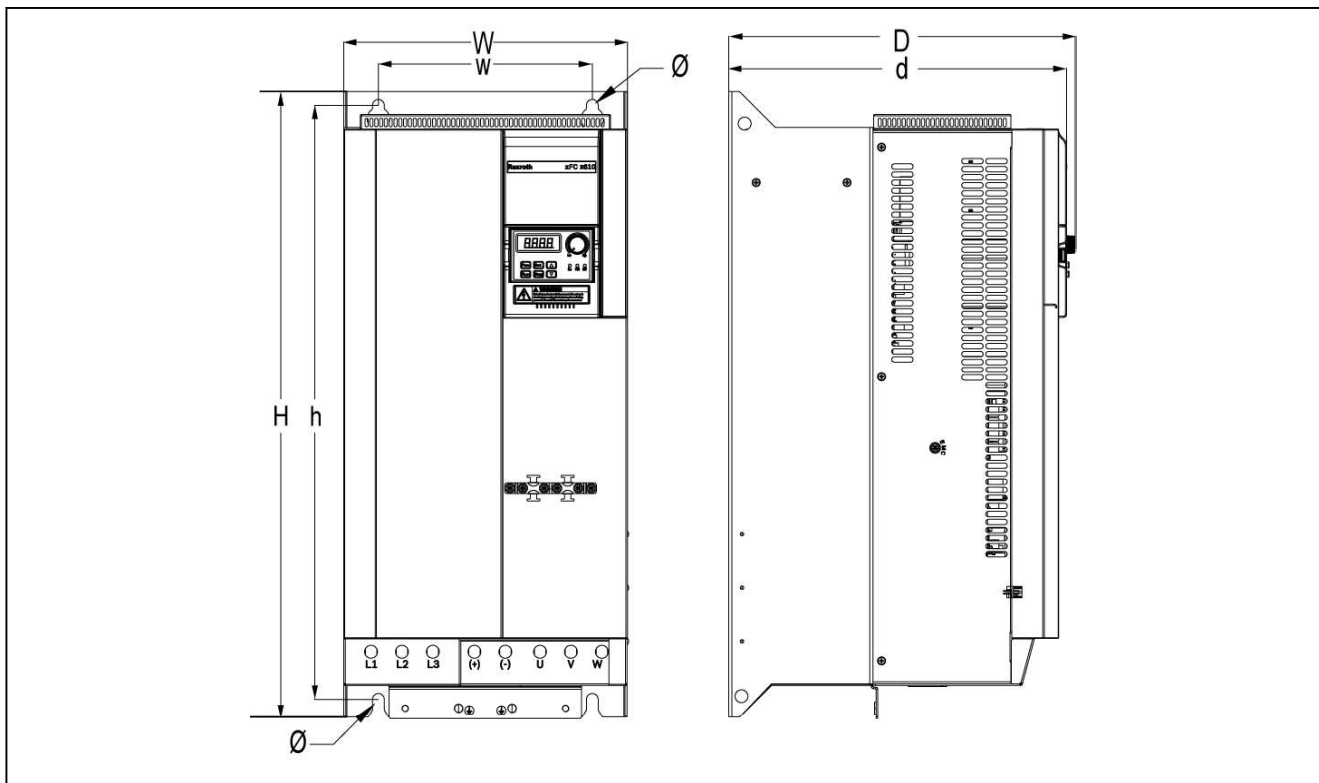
VFC 5610 45K0...55K0 dimensions figure
